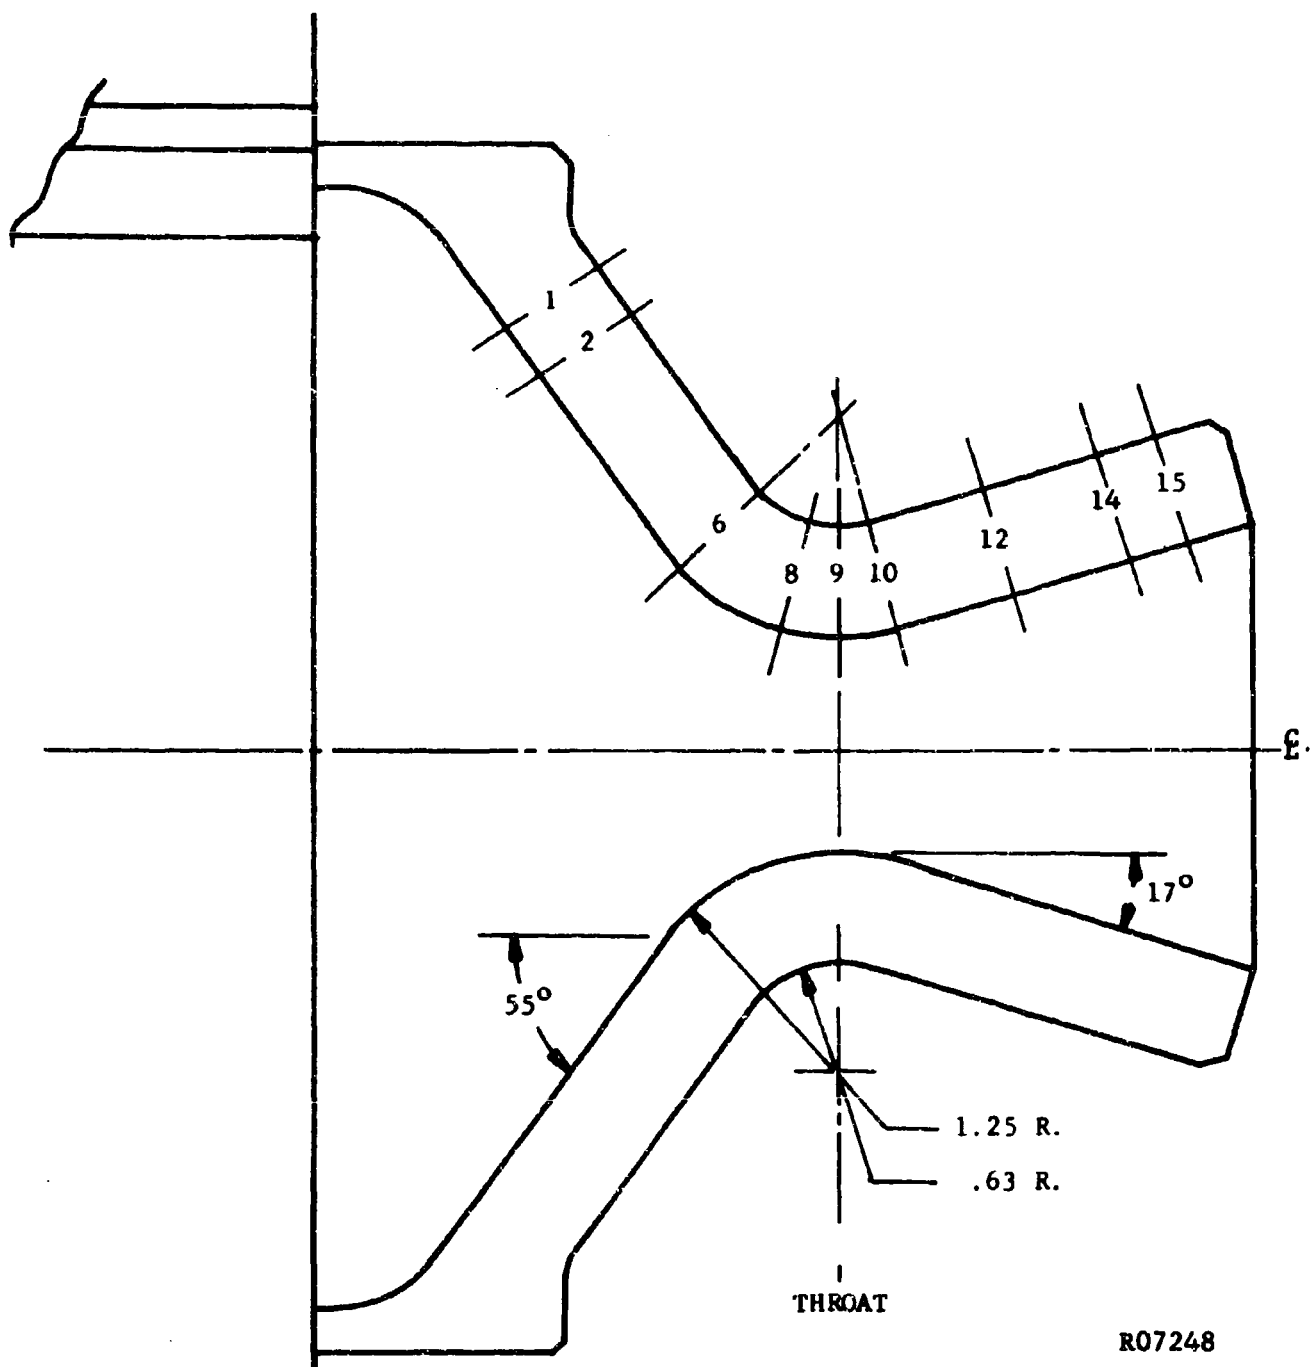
SURFACE THERMOCOUPLE LOCATIONS
